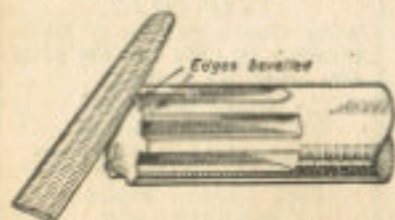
Leading edge of axle-shaft splines can be filed so that the shaft will slide home more easily.
